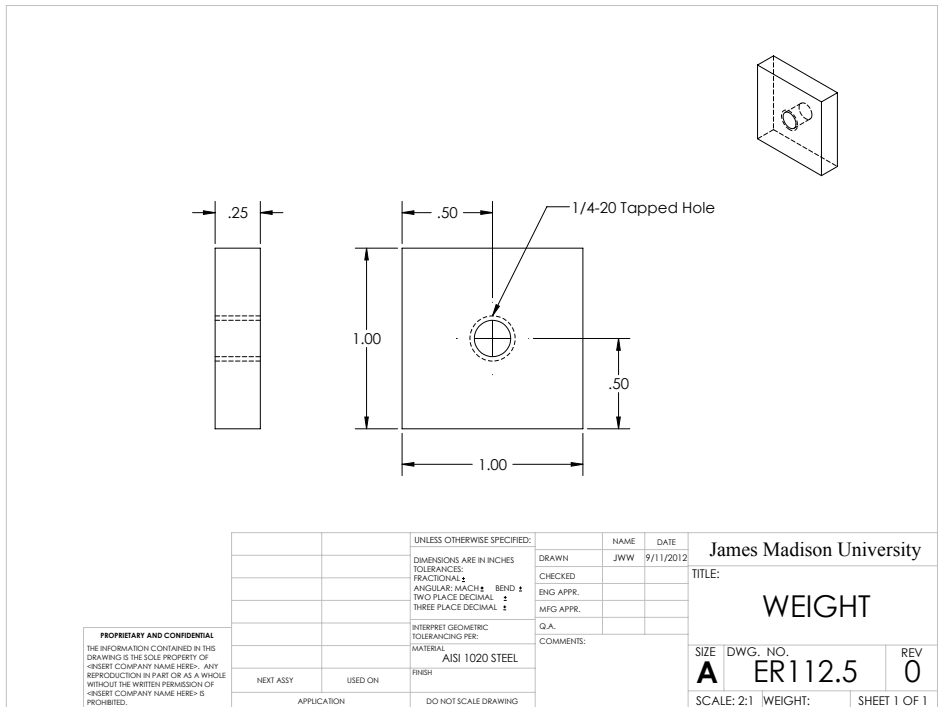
Engineering drawing of an aluminum counterbalance used to illustrate engineering drawing components and provide data for calculating the force acting upon the end of the balance beam..
